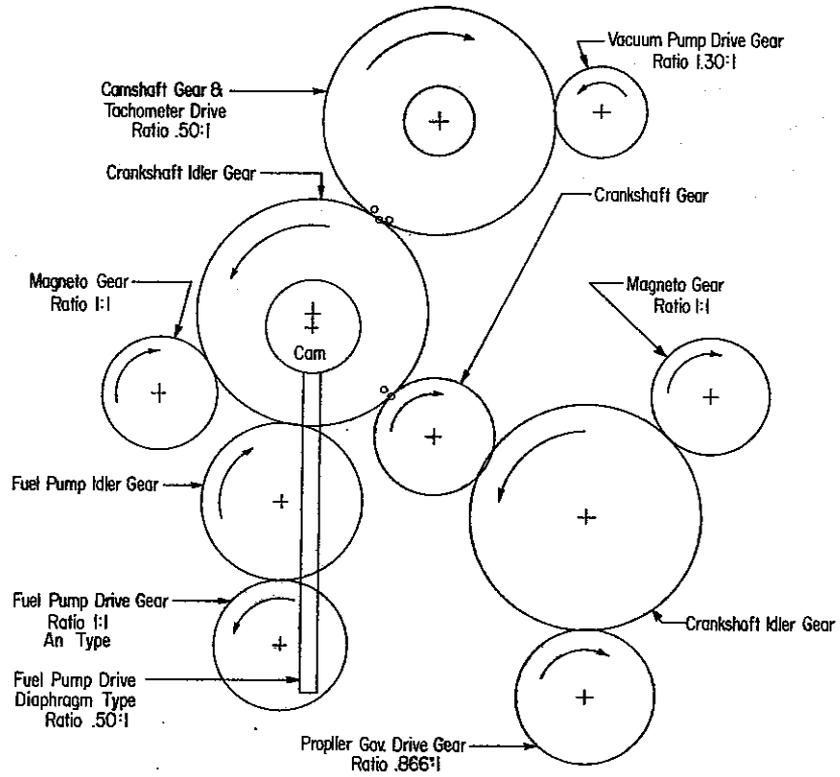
Gear Train Diagram - Typical 4 Cylinder Engine
